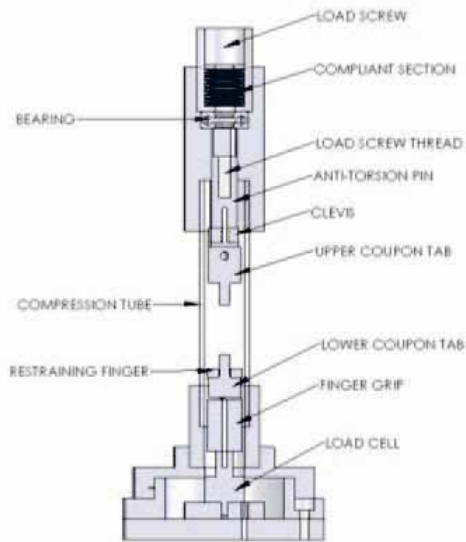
Schematic of *in situ* loading fixture. Tensile specimens fit between the upper and lower coupon tabs.
